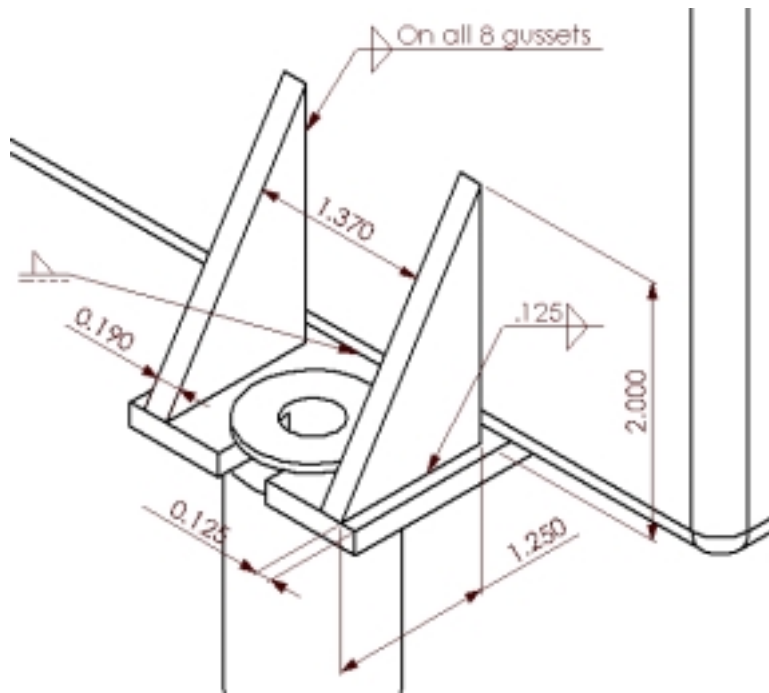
Gusset / box and gusset / tab welds.
